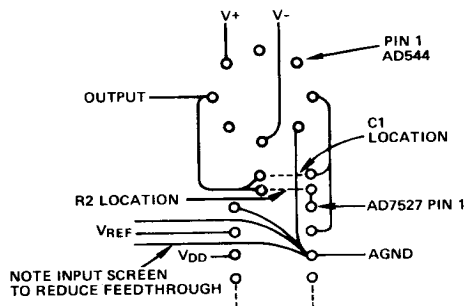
Suggested Layout Shows Copper Side (i.e. Bottom View)
